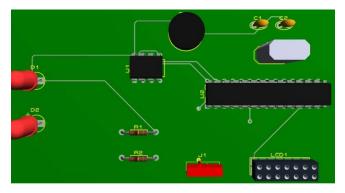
View of the PCB showing the component placements from the designed circuit in Proteus
